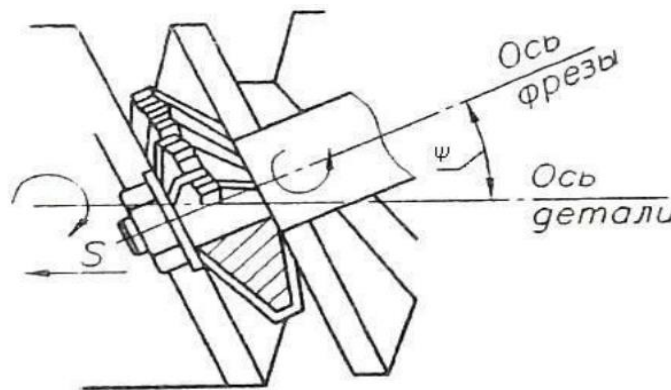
Scheme of the installation disc cutters in processing external helical grooves.
